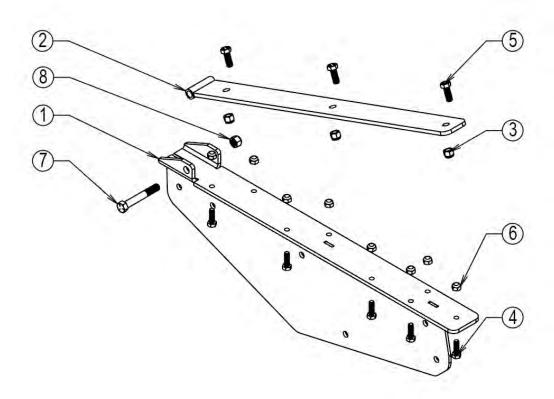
Roto-Shear Mount Bracket Universal (MBo8)
